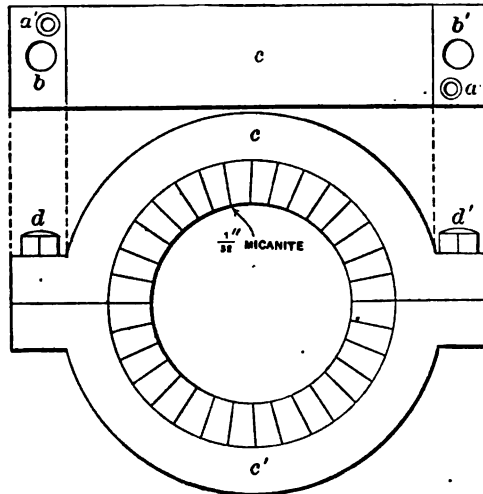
Segments of Commutator Held in a Clamp for Machining Hole and Ends.
